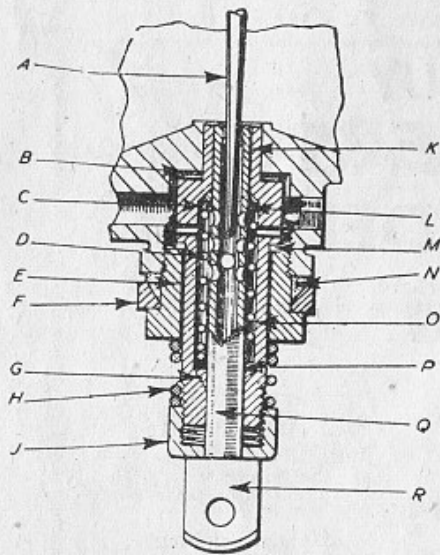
Jet assembly of the S.U. carburettor. A, Taper needle. B, Copper packing washer. C, Packing washer. D, Spring. E, Jet holding screw. F, Conical sealing washer. G, Packing washer. H, Jet locking spring. J, Jet adjusting nut. K, Top half jet bearing. L, Gland washer. M, Copper packing washer. N, Sealing washer. O, Bottom half jet bearing. P, Gland washer. Q, Jet. R, Jet head.
